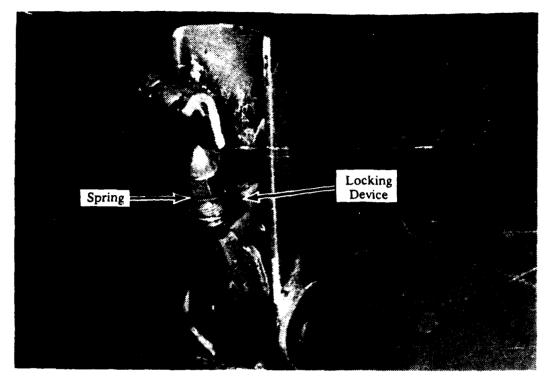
Locking Device and Spring in IEAFS Latch Lever
